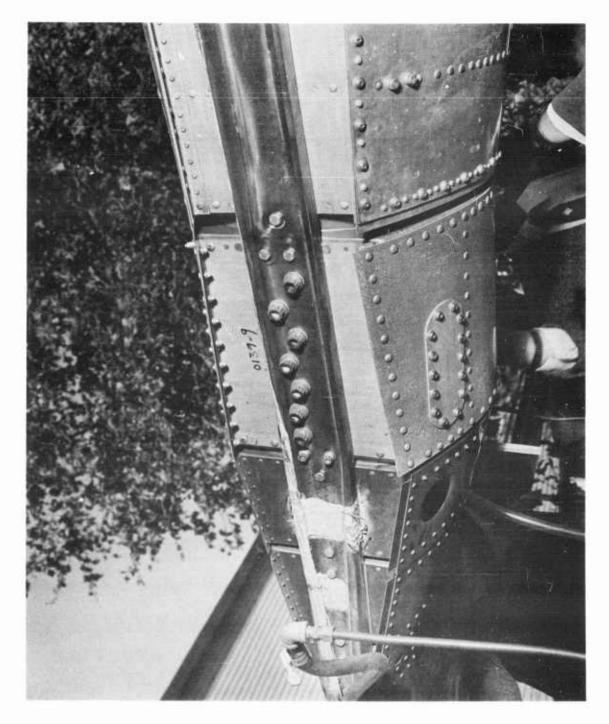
Front Spar Cooling Tube Arrangement and Typical Strain Gage Installation
